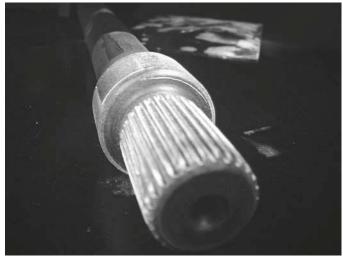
Axle with Circumferential Crack in Shoulder
